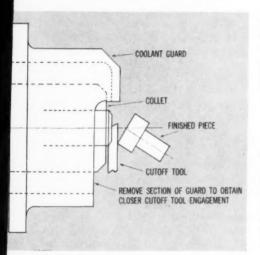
Set cut-off tool as close as possible to collet or spindle. If necessary, remove slight amount of material from coolant guard to get tool closer to spindle head.
